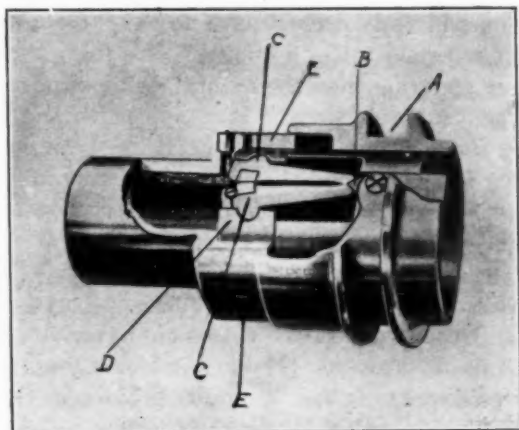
EXAMPLE OF CLUTCH OF SMALL DIAMETER
